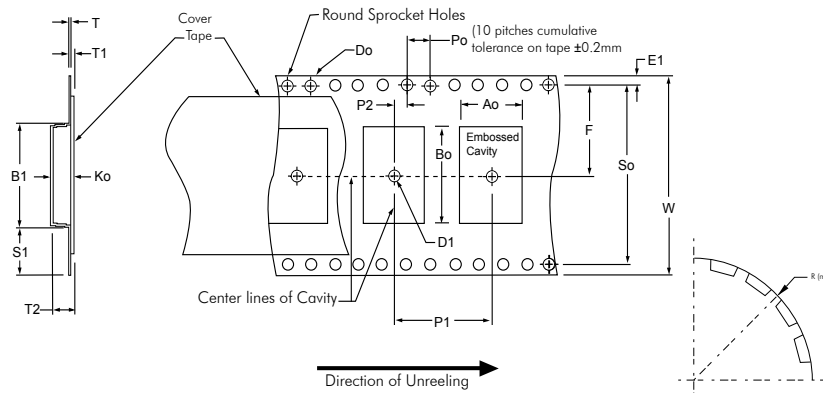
Standard Embossed Carrier Tape Dimensions
